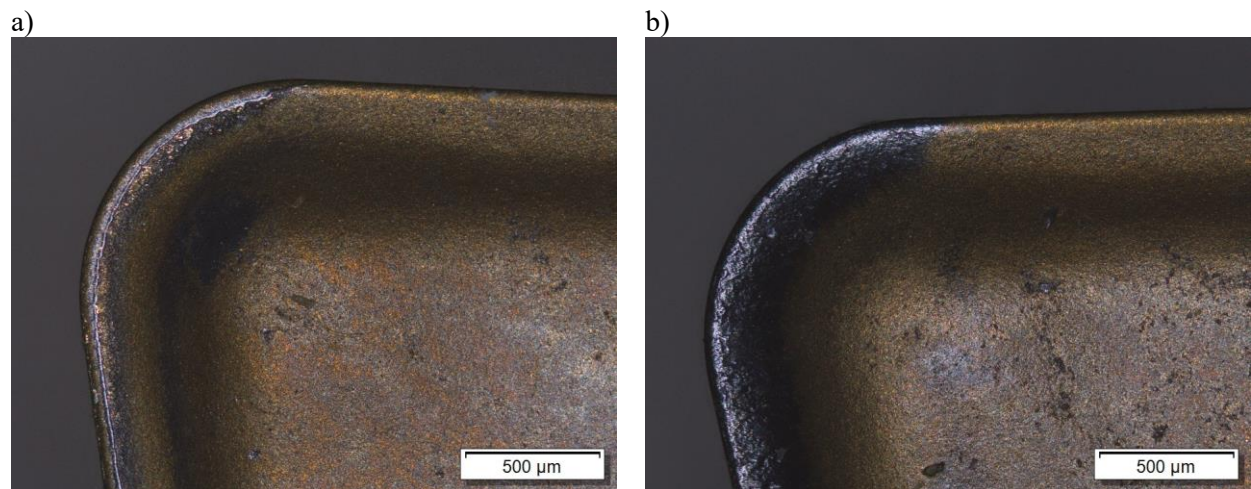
Tool wear - flank surface: a) CuZn40Pb2, b) CuSn5Zn5Pb2
